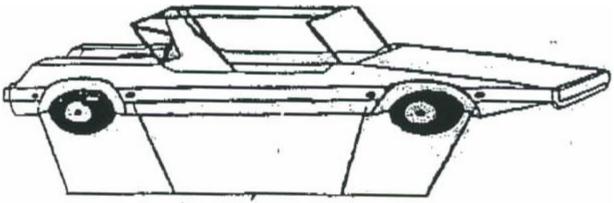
Location of additional bolts (within 2" of wheel opening area)
